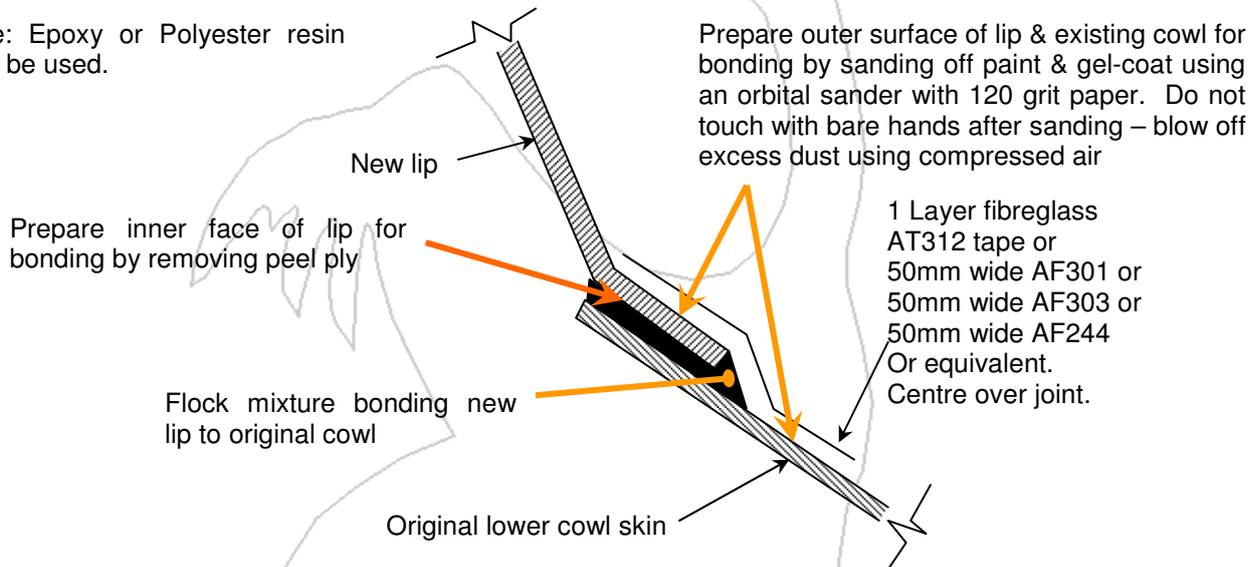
Cross Section View Through Large Cowl Lip Attachment
